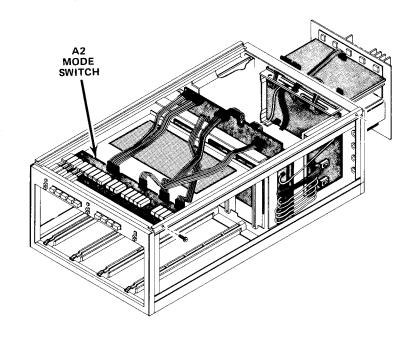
A2-Mode Switch Circuit Board Assembly.
